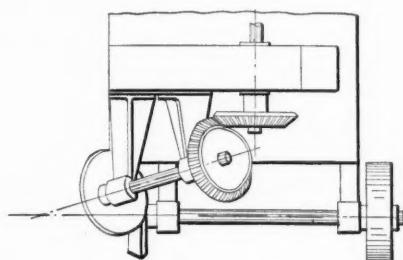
Arrangement of Bevel Gearing with a "Double" Diagonal Shaft.
